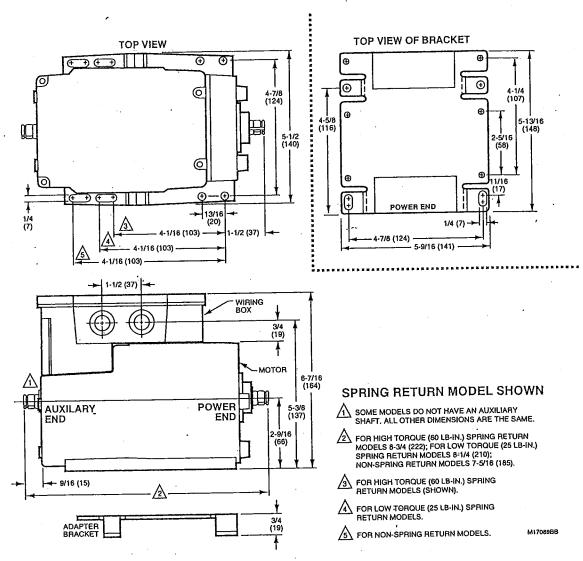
Series 72 Modutrol IV Motor dimensions in in. (mm).
